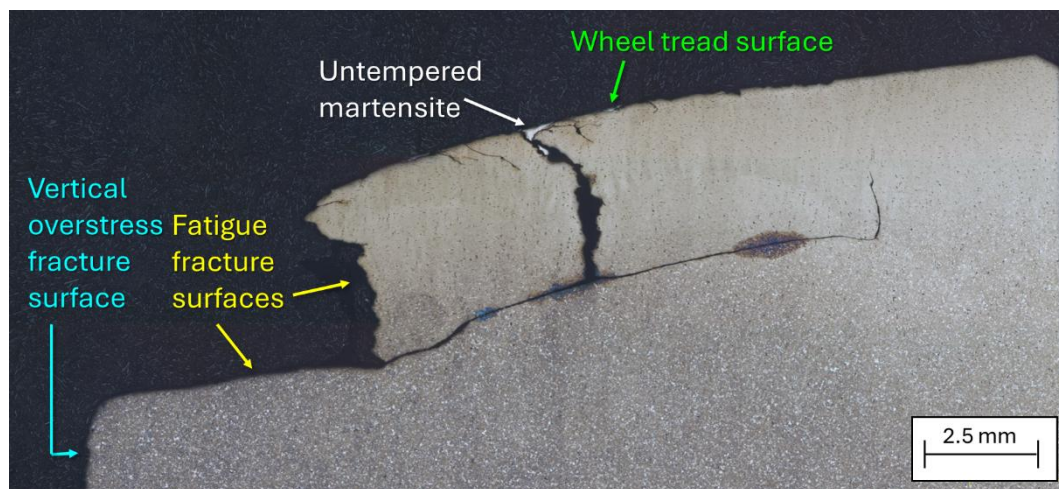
Cross-section through the fracture surface, showing subsurface cracking, as well as the location of the fracture surface features.
